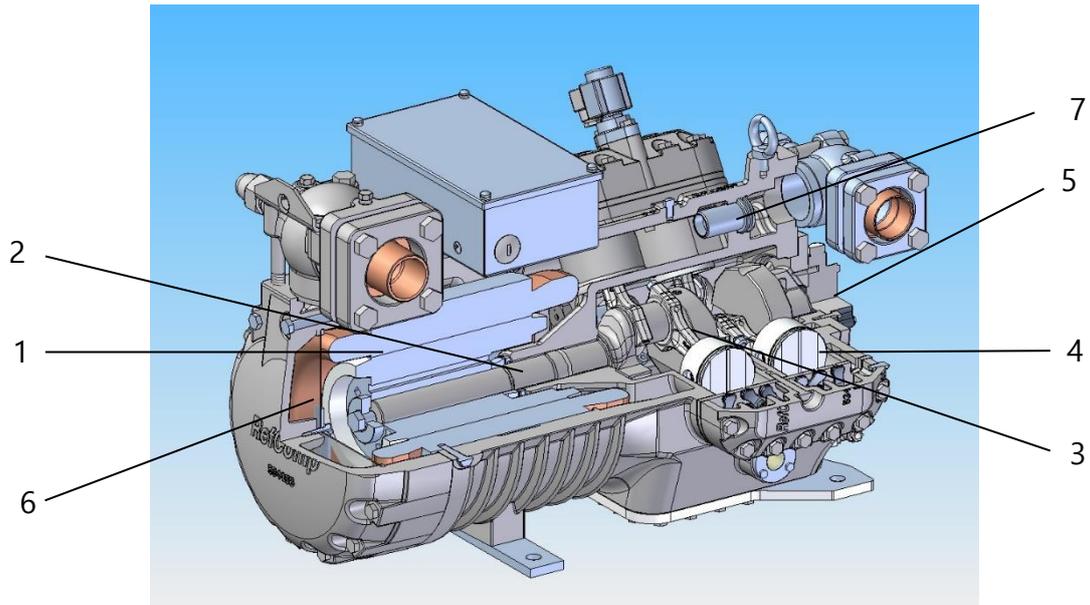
Cross section of PP8-L/Hxx (forced lubrication with oil pump)
